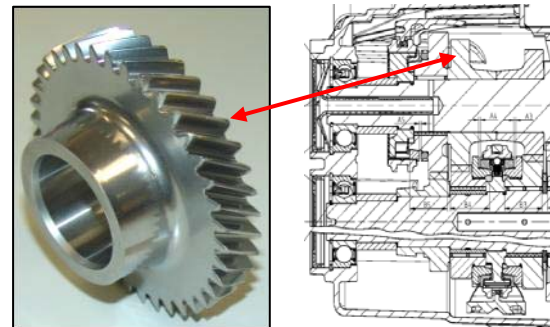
Actual gear (left), assembly drawing with gear (right)
